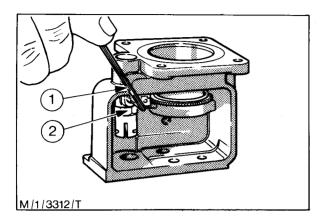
Removing the Maximum Fuel Screw Assembly
